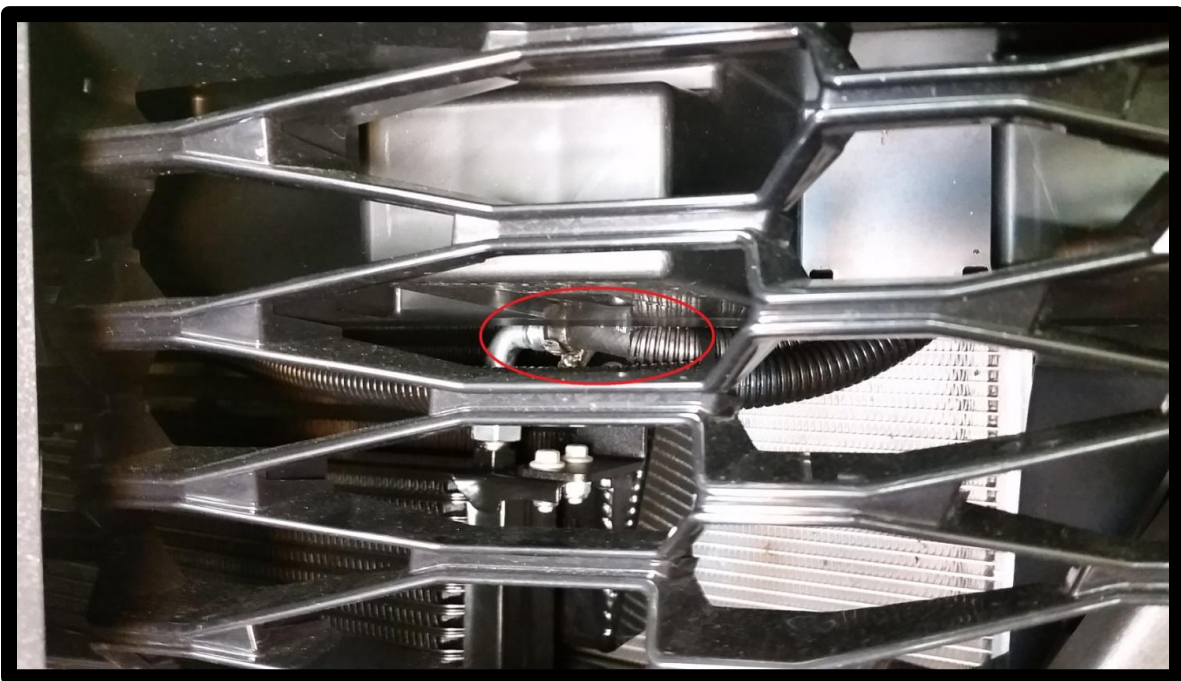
Incorrect Positioning of Oil Cooler Fittings (With Fascia Installed)
